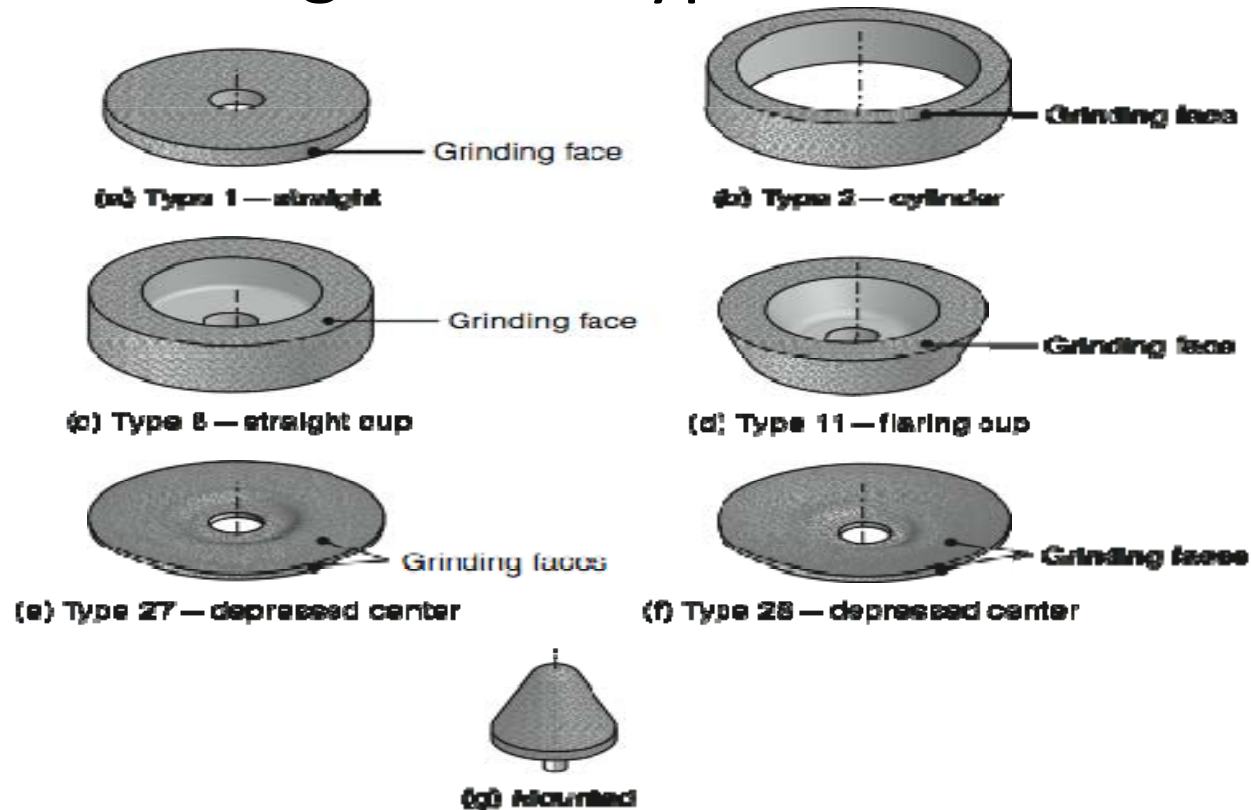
Some common types of grinding wheels made with conventional abrasives (aluminum oxide and silicon carbide). Note that each wheel has a specific grinding face; grinding on other surfaces is improper and unsafe.
